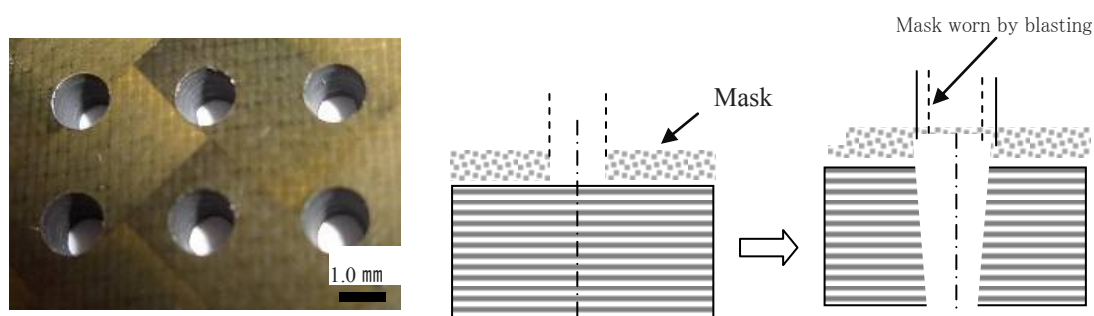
Holes photos and tapered hole and explanation to become taper hole
